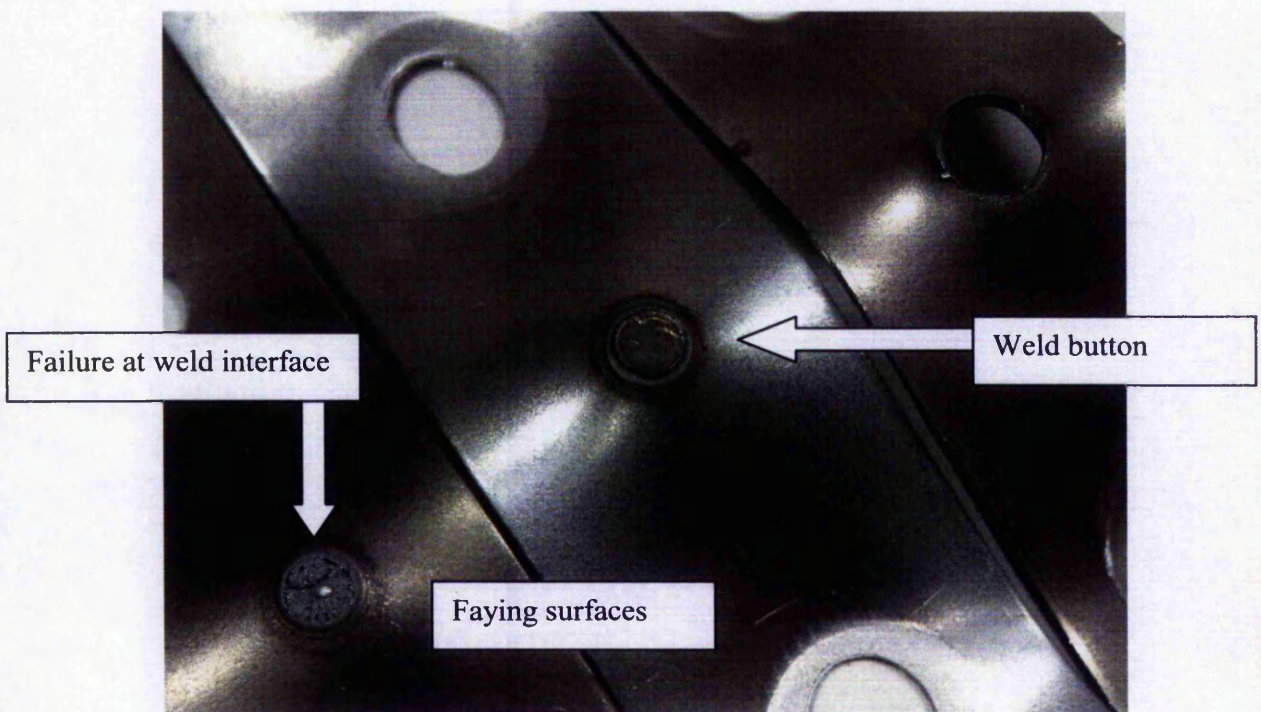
Spot weld failures due to normal/cross tension testing
